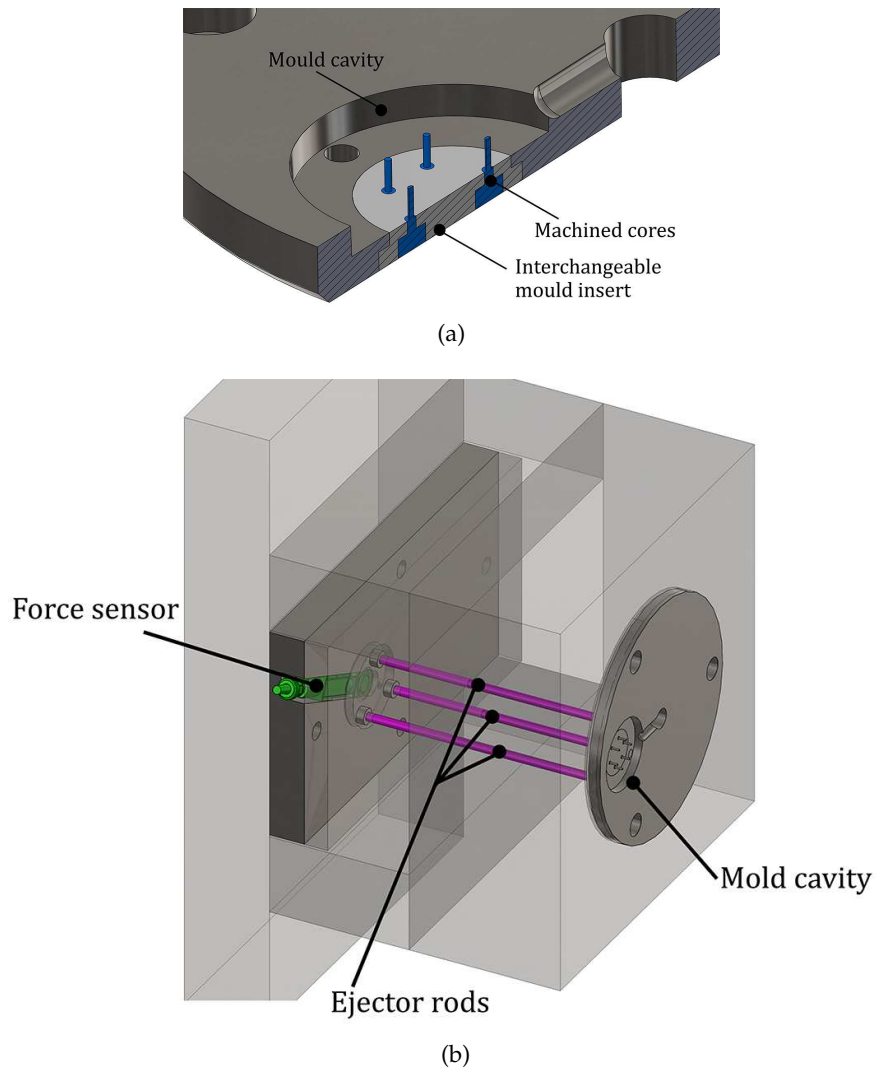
Design of mold insert and assembly - *MOLD B* [139].
